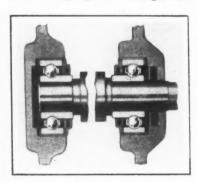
Typical Mounting of "N-D-Seal" Ball Bearings
